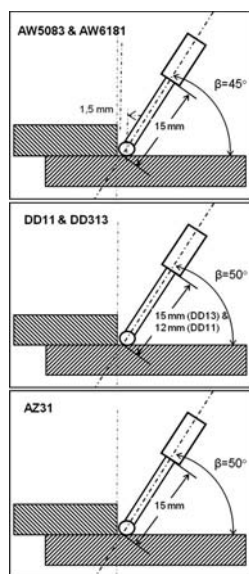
Welding-torch positions for similar overlap welded joints
